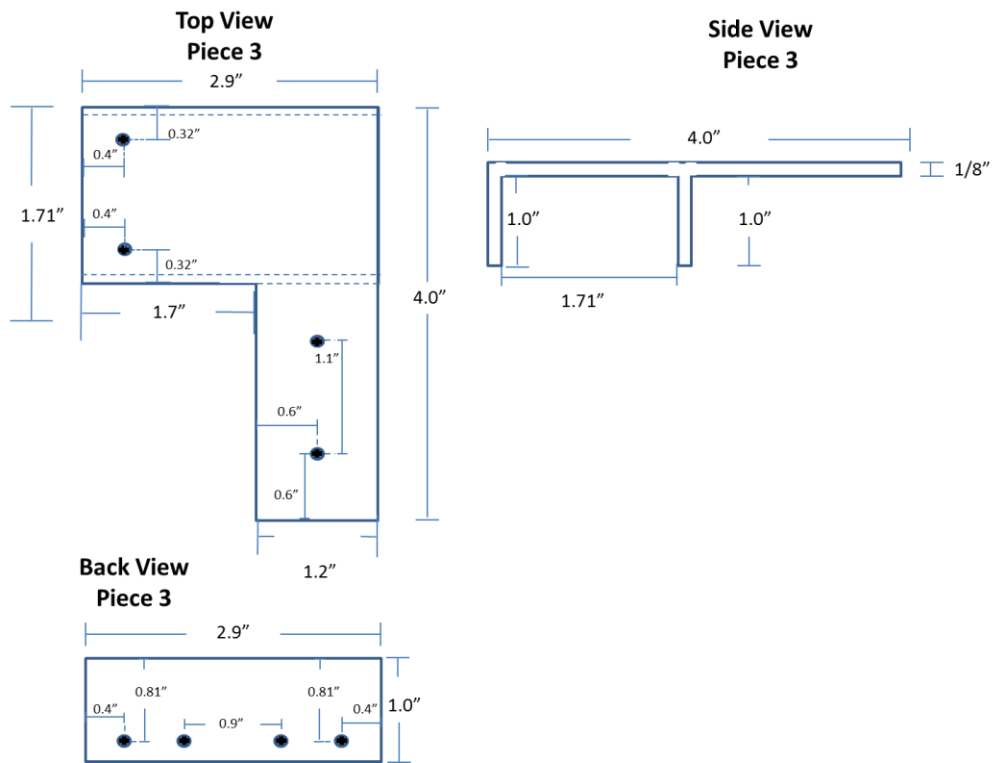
Schematic of piece 3 for motorized stage fixture.
